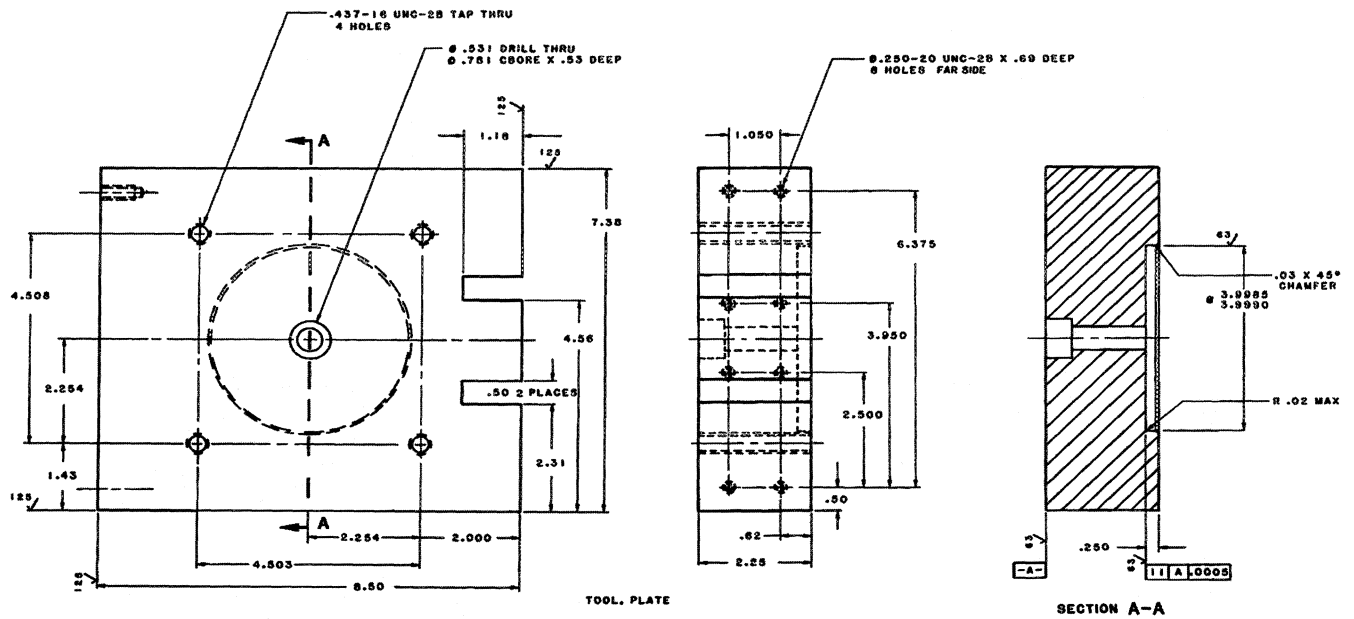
Detail with Both an External Right Side View and a Full Right Side Section
